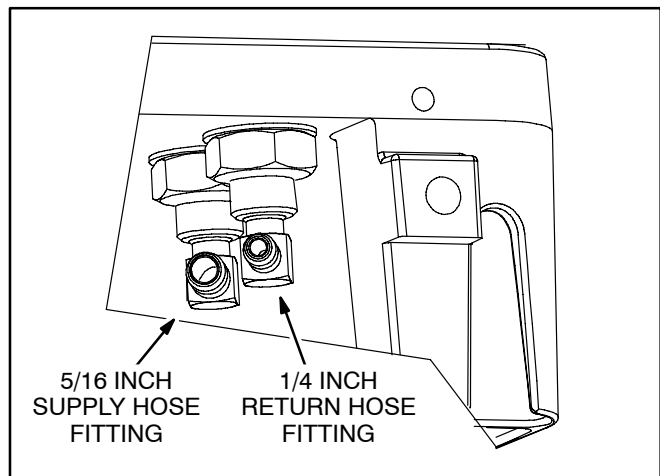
FUEL FITTINGS—LEFT END OF BASE
